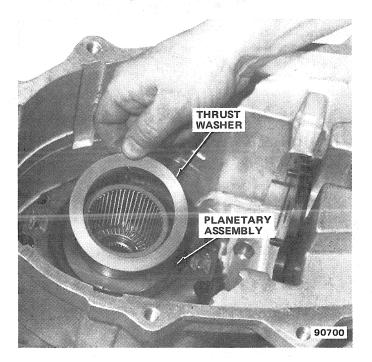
D-60 Planetary Thrust Washer Removal/Installation
